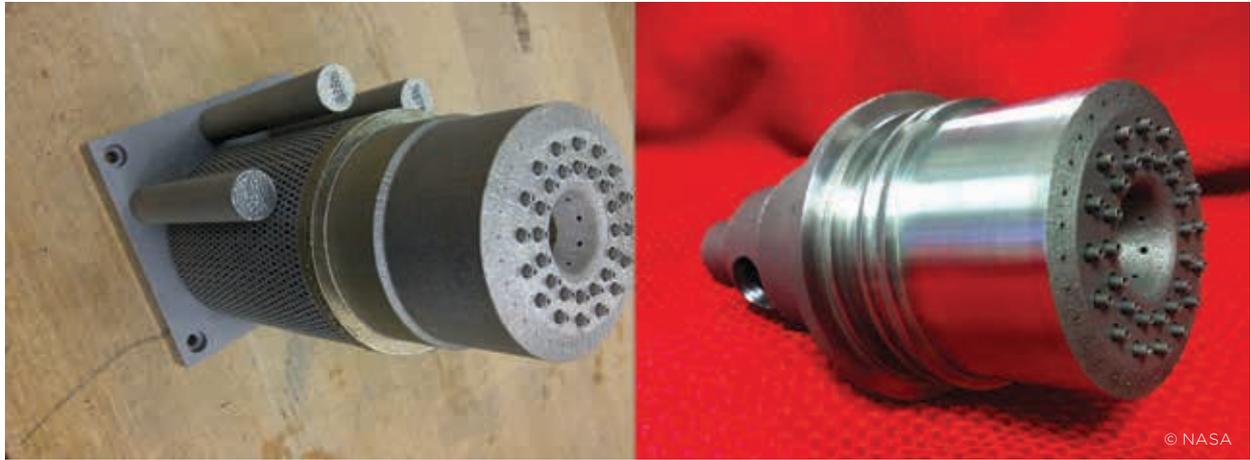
NASA rocket injector, manufactured with PBF AM, reducing 115 parts to two
